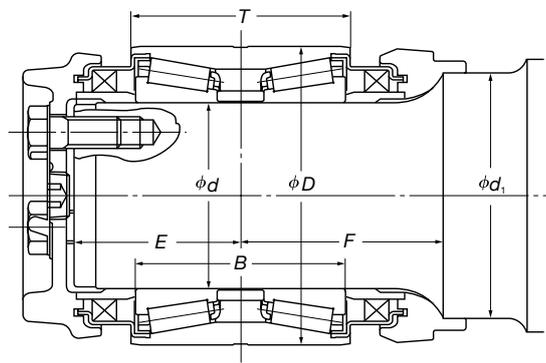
Sealed-Clean Rotating End Cap Tapered Roller Bearings
